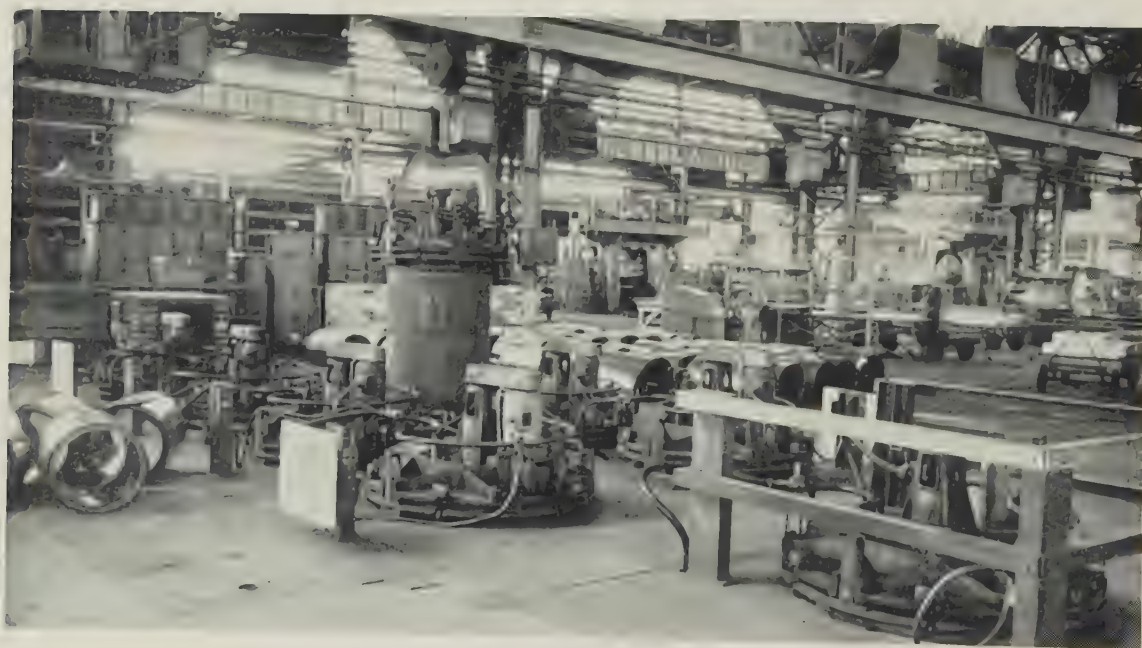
Pit Furnace for Annealing of Copper Wire and Strip.
